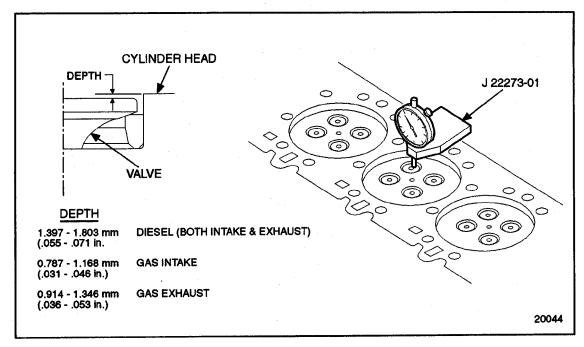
Valve Head-to-Cylinder Head Measurement
